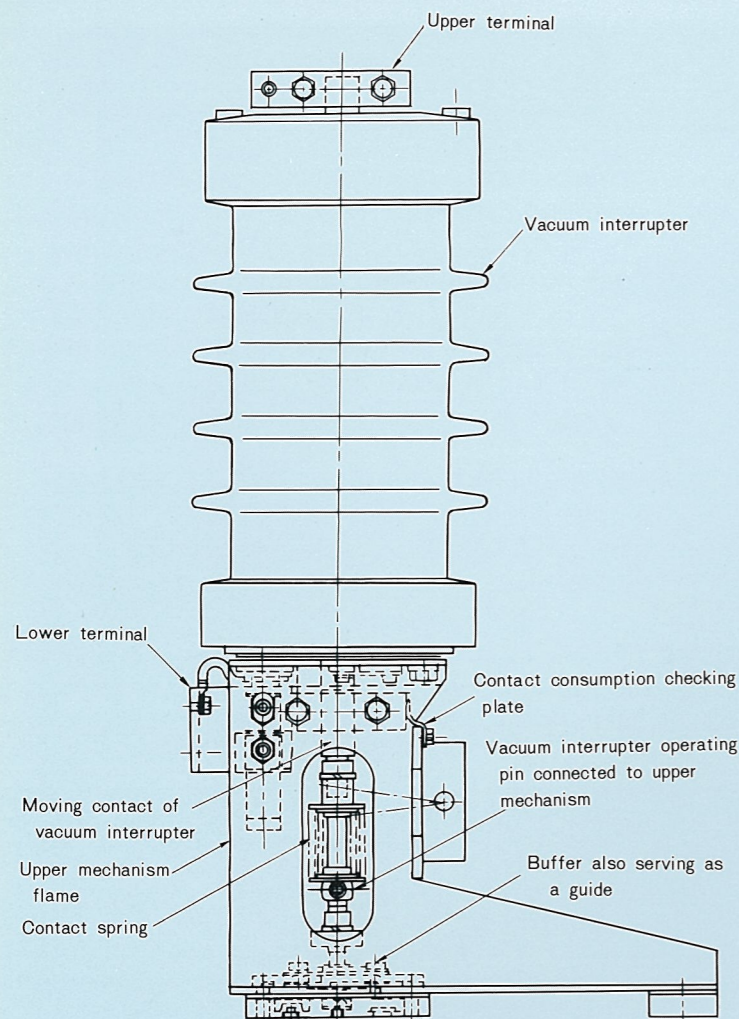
Structural drawing of breaking part of switch for 36kV, 600-1200A
